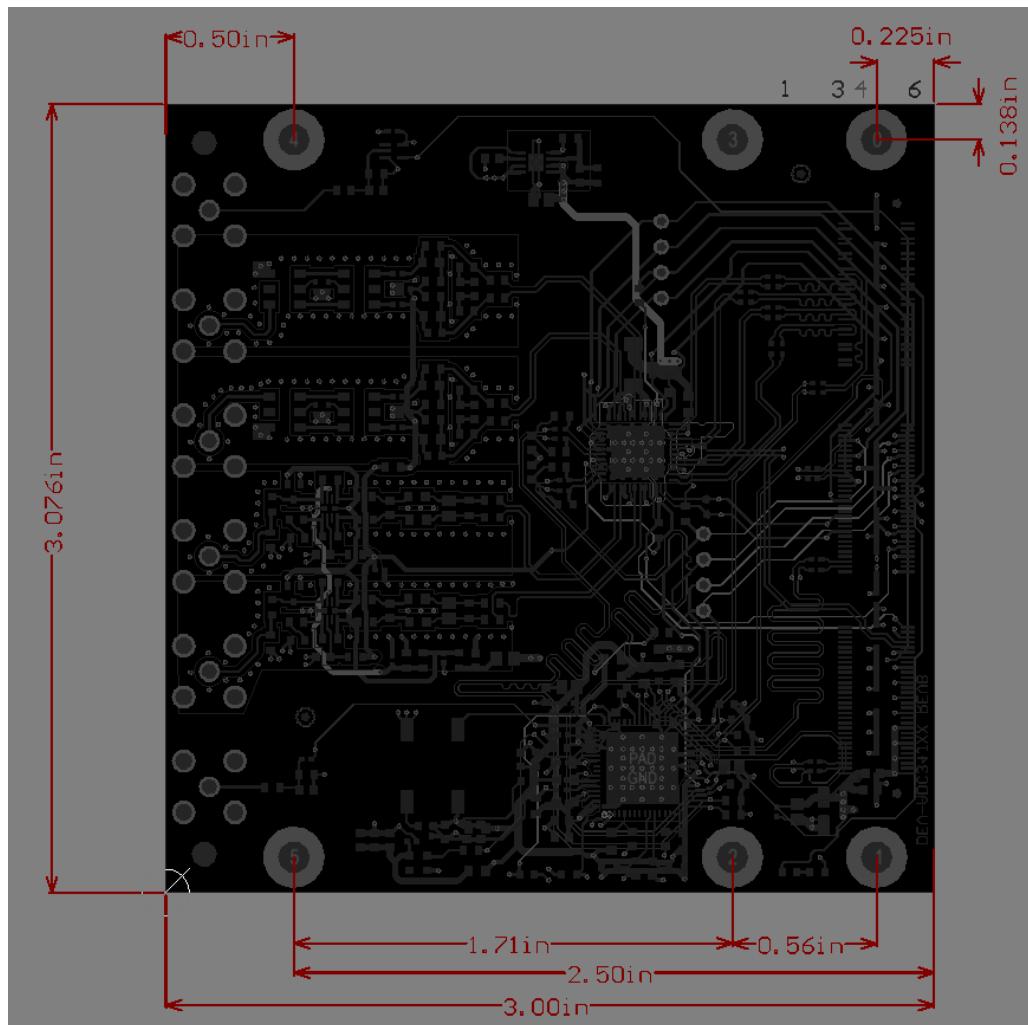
DEV-ADC34J22 Module Mechanical Dimensions
